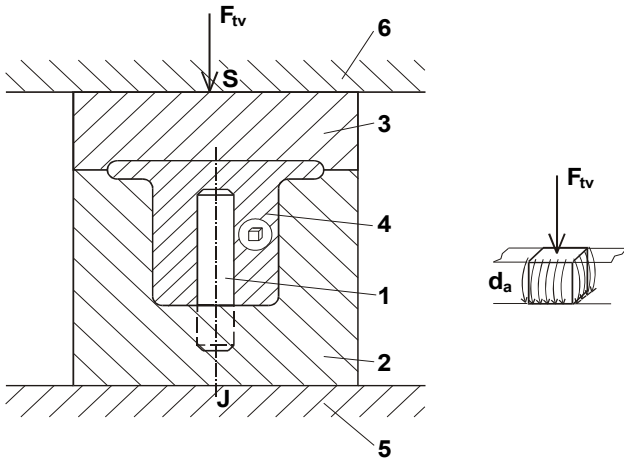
Schematic of reworking the casting in a magnetic field: 1 - mandrel, 2 - lower part, 3 - upper part, 4 - workpiece, 5 - press table, 6 - frame
